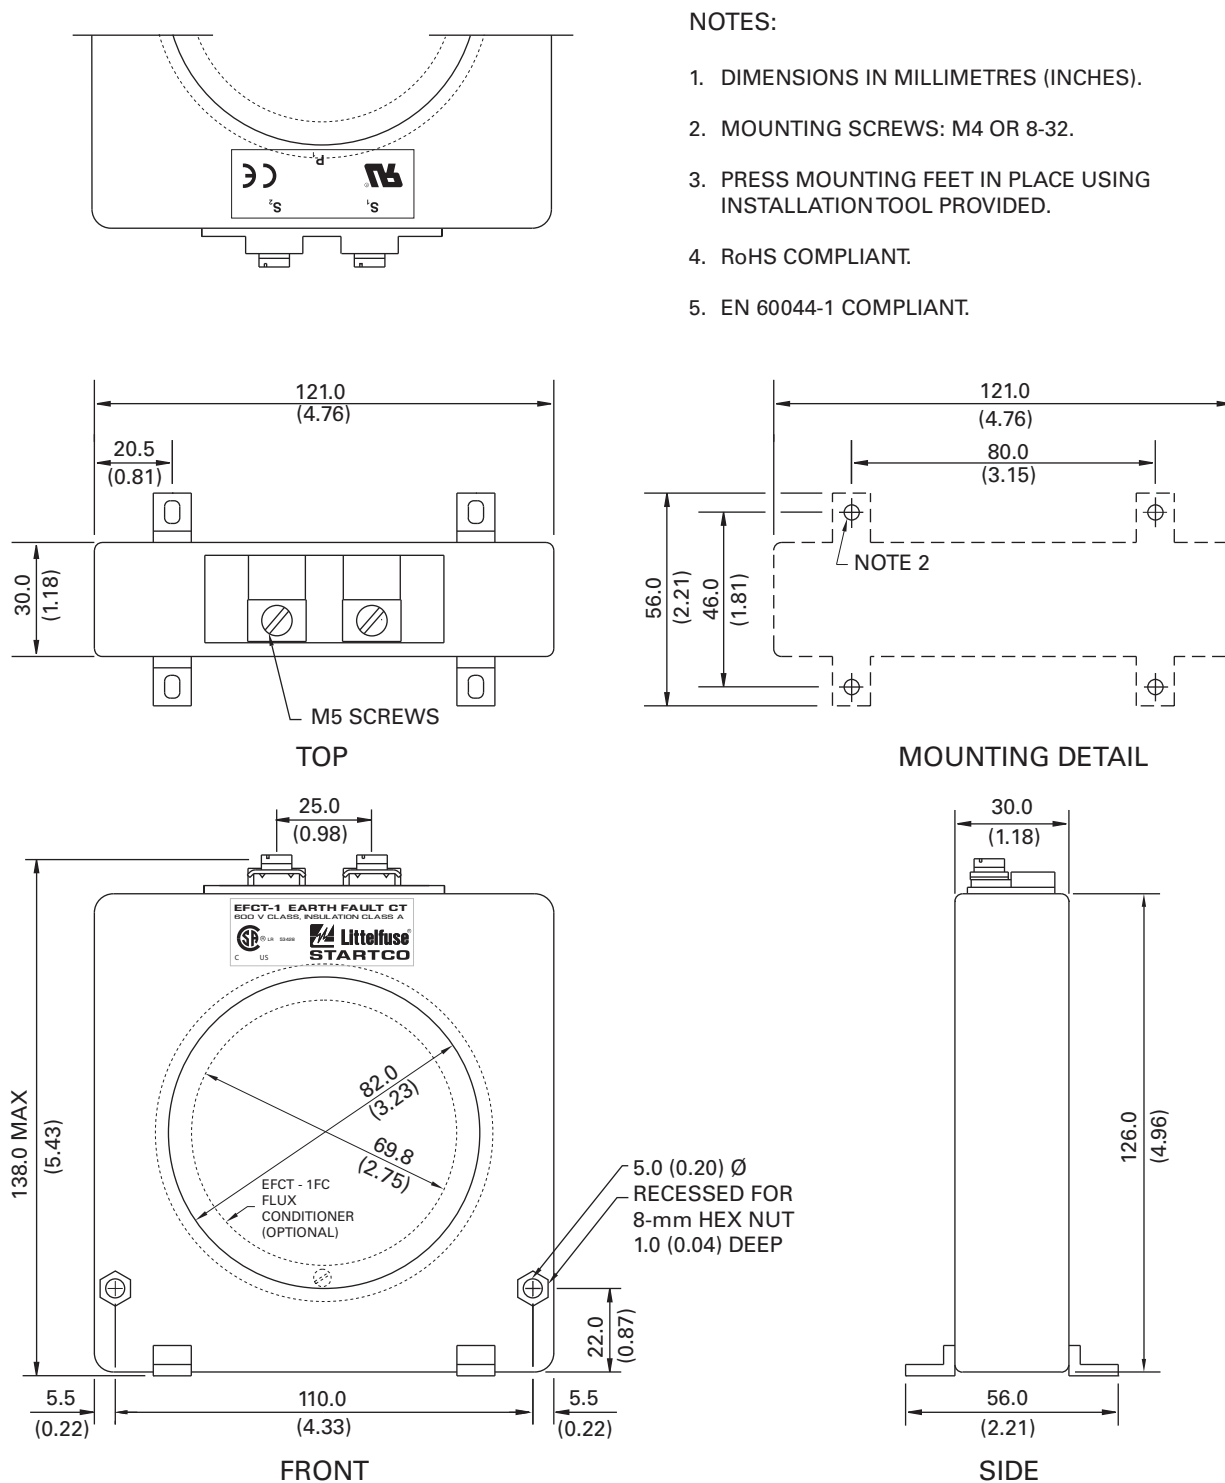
EFCT-1 Outline and Mounting Details.
